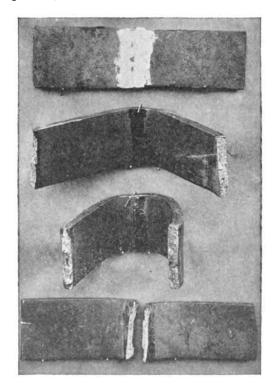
Test Plates Showing Binding Strength of Electric Welds
